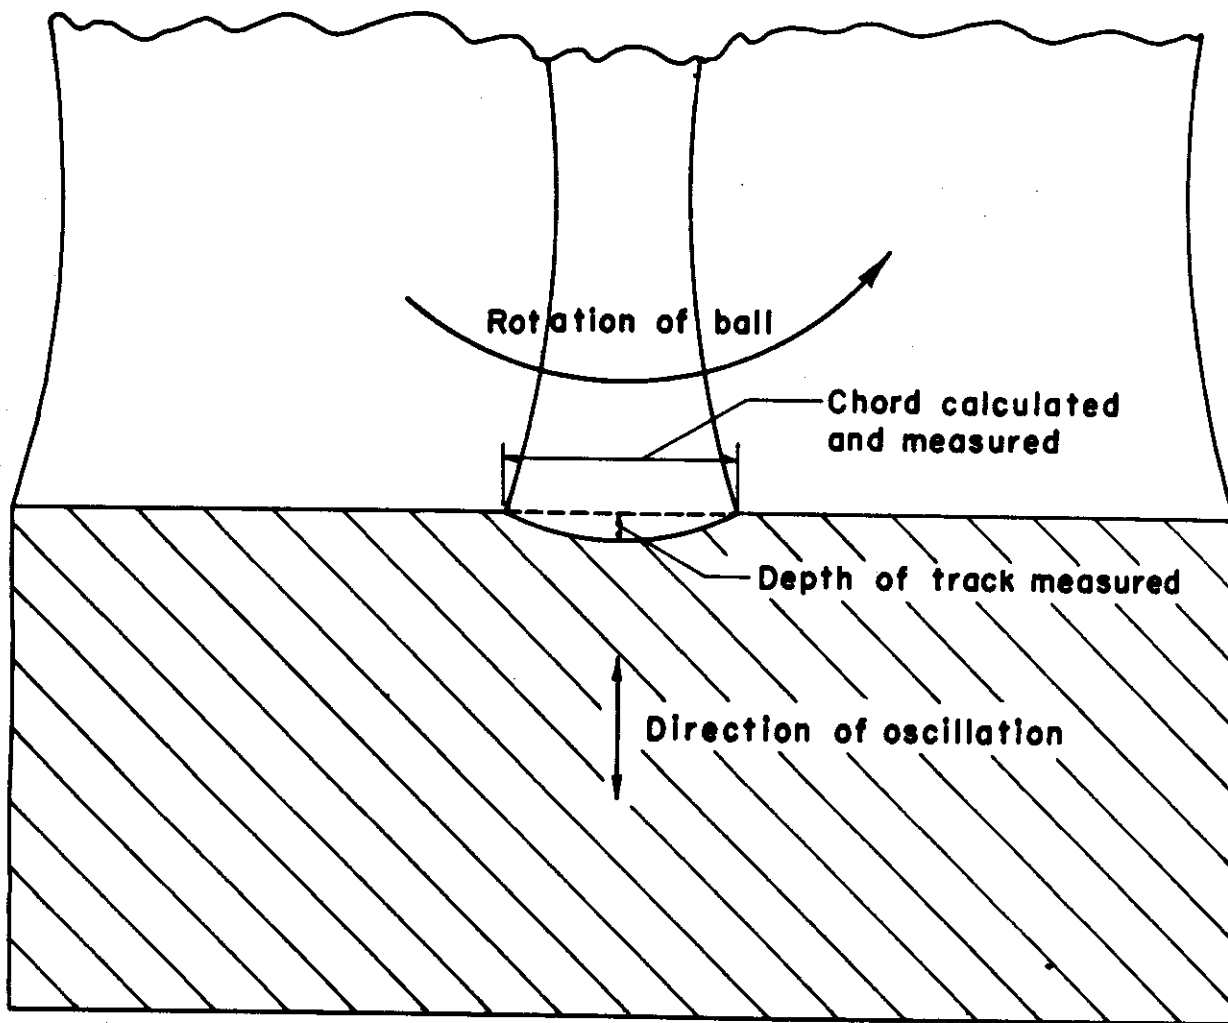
SECTION OF WEAR TRACK ON CAGE-SPECIMEN-POCKET SURFACE
